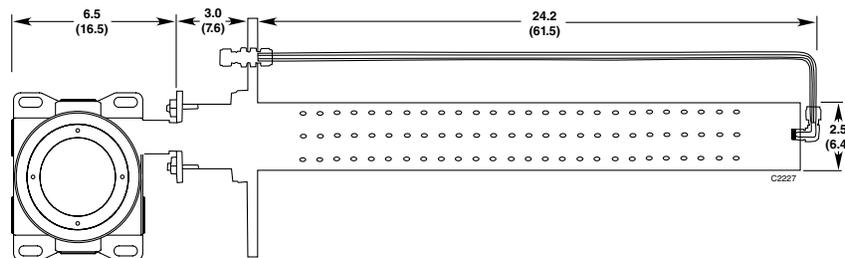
Dimensions of PIRDUCT Detector in Inches (cm)
